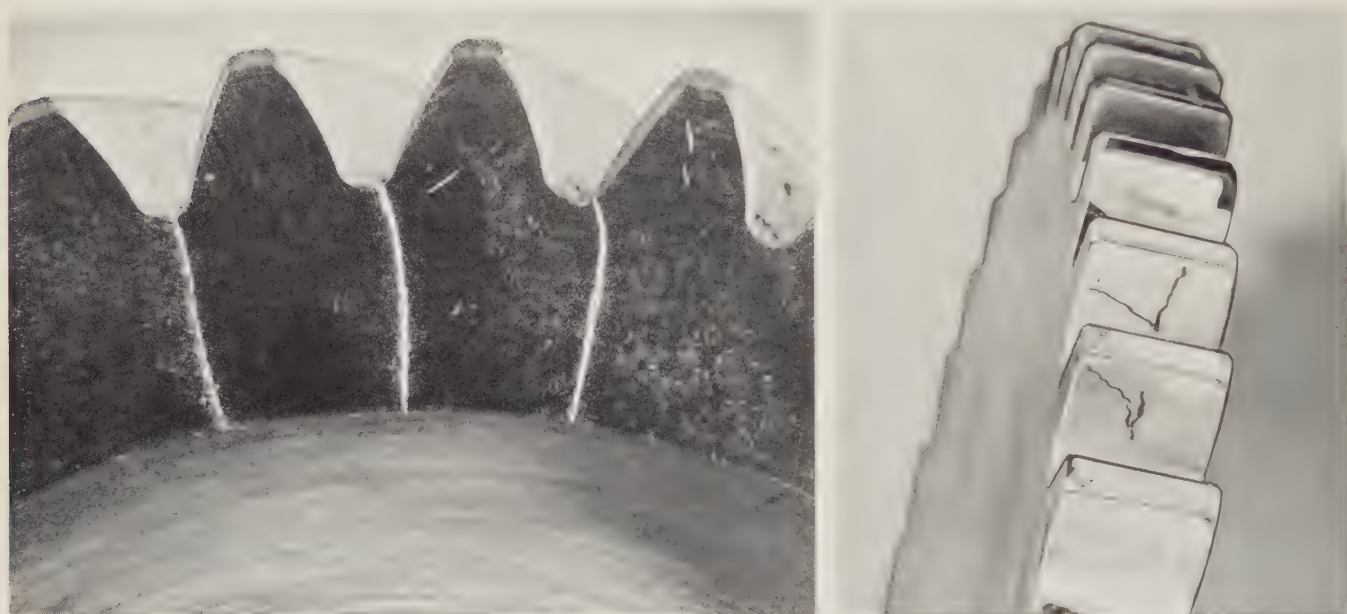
Imperfections that may occur in finish processing are cracks resulting from grinding operations. These cracks may not be visible normally but they can be made to appear by non-destructive testing methods as illustrated in these two gear examples. The applications of testing methods shown are magnetic particle (left) and dye penetrant (right).
